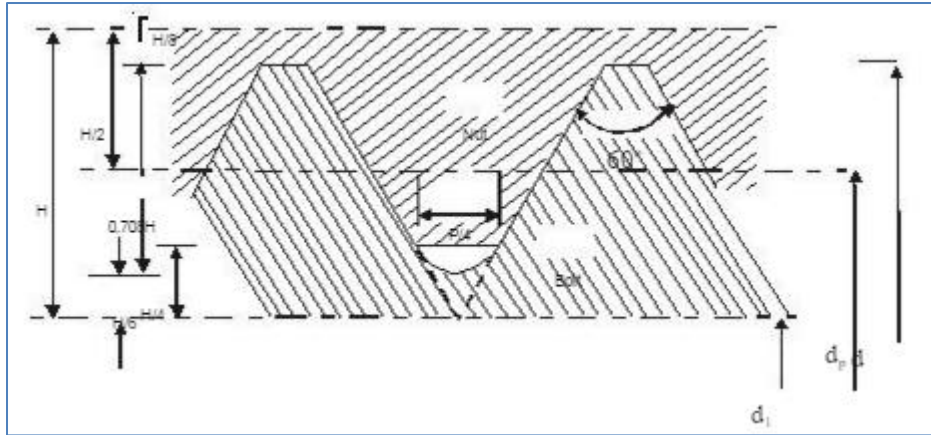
Profiles of Fastener Threads on Screw (Bolt) and Nut
